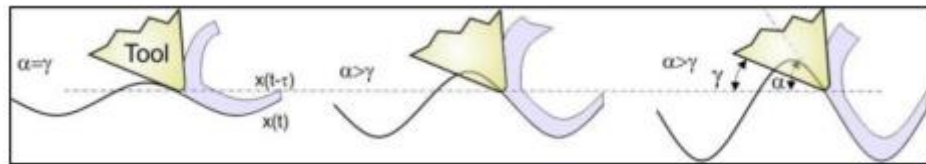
Mechanism of indentation between tool and workpiece (Tunc and Budak, 2012)
